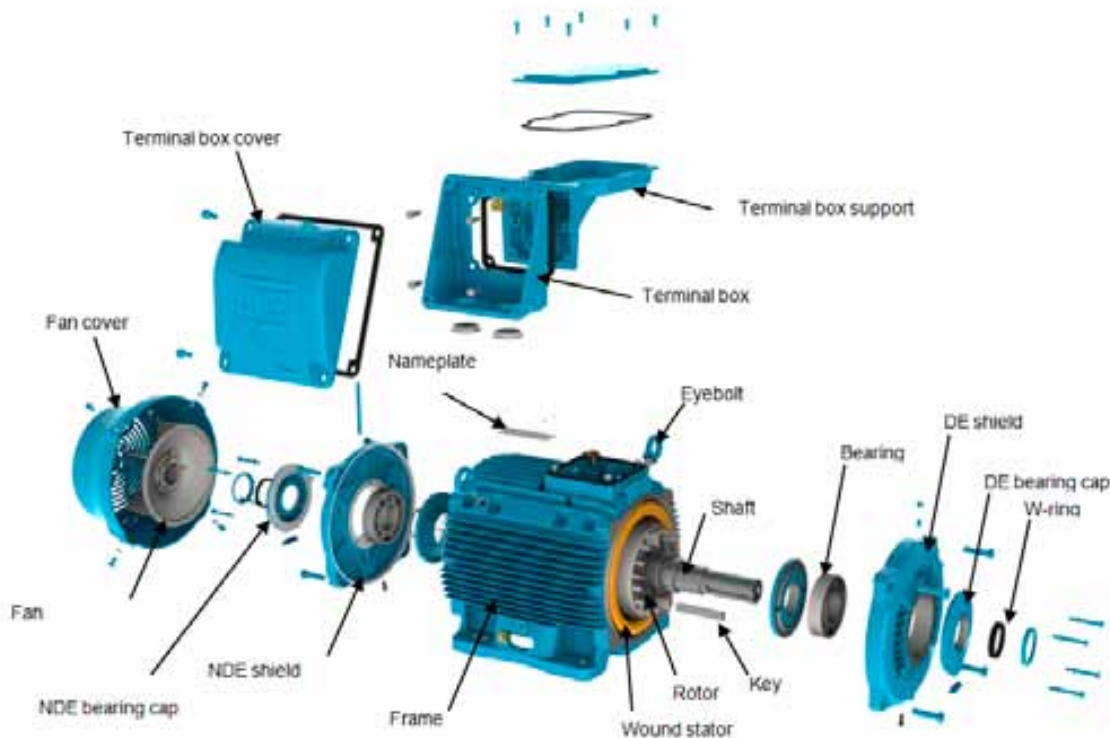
Exploded view of the components of a motor with type of protection "n".
